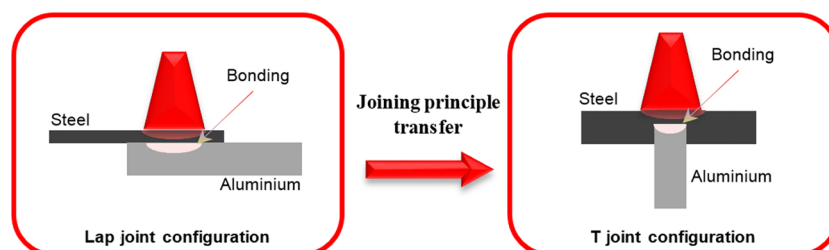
Schematic representation of laser conduction welding of steel to aluminium transfer from lap-joint to T joint configuration.
